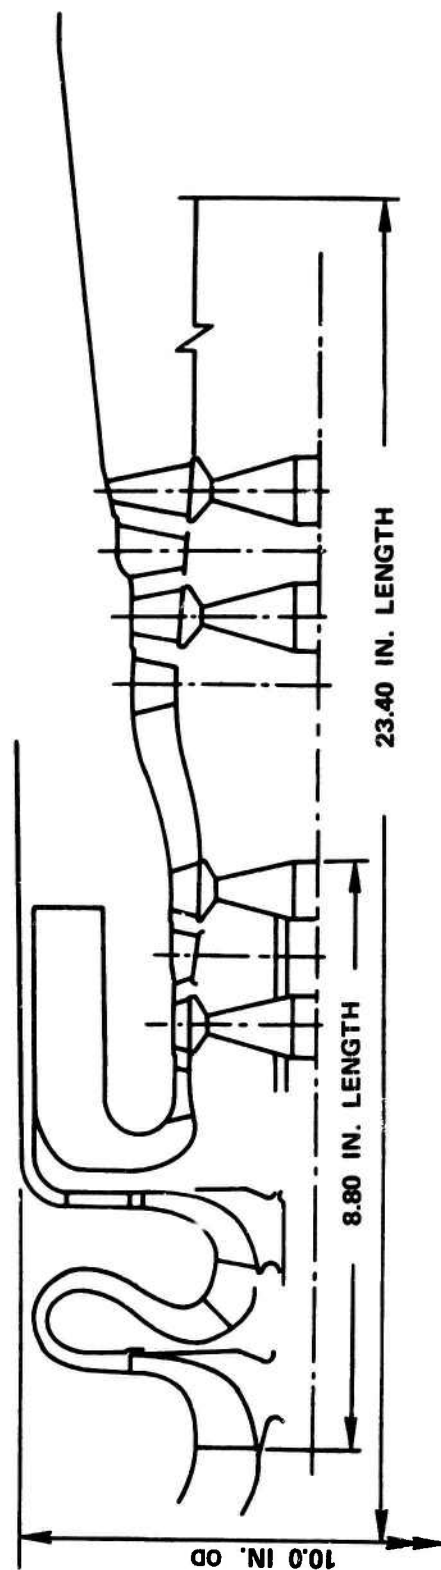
Turboshaft Engine Schematic With Two-Stage Centrifugal Compressor, Reverse Annular Combustor, and Two-Stage Axial Turbine.
